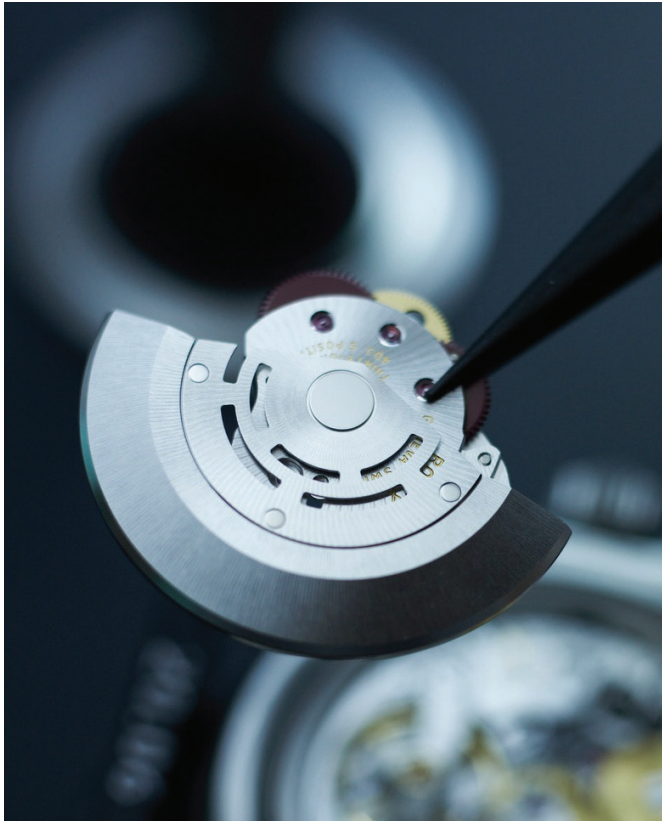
The rotor and auto-reverser assembly from a calibre 3135. The rotor is suspended off a single plain bearing or rotor post, also called an axle by the Swiss. The new calibre uses a ball-bearing, and this is in one piece with the rotor.
